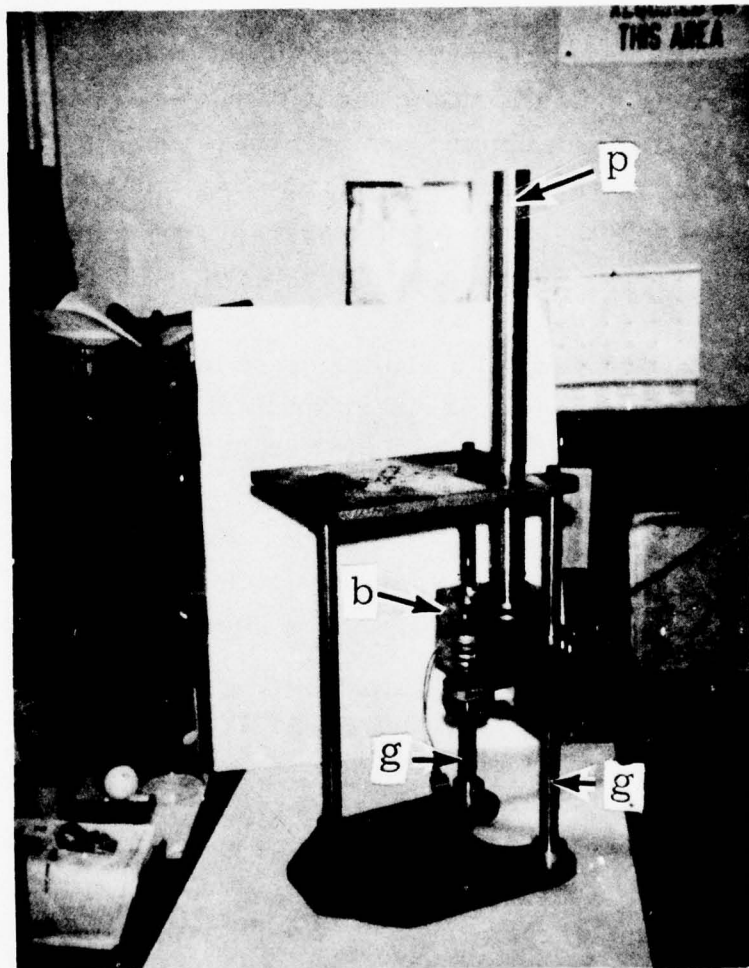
Pedestal Tube Assembly for Arc-Plasma Spraying.
